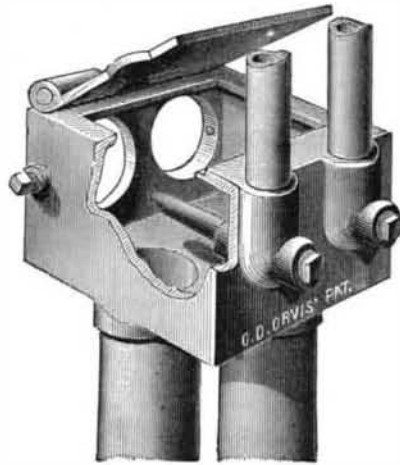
VACUUM CHAMBER WITH TWO STEAM JETS FOR INJECTING HEATED AIR AND STEAM INTO THE FURNACE.
